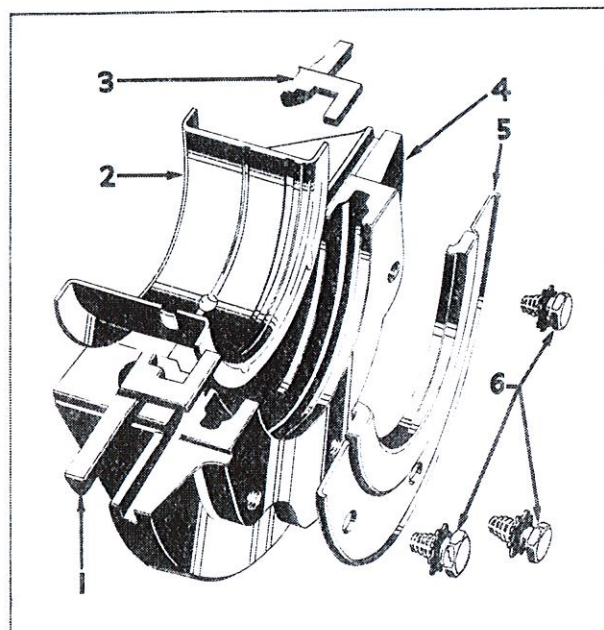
Crankshaft Rear Bearing Cap Oil Seals
